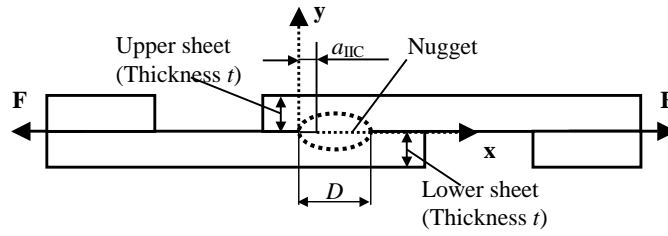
Critical crack length (a_{IIc}) at spot-weld in fracture mode II.
